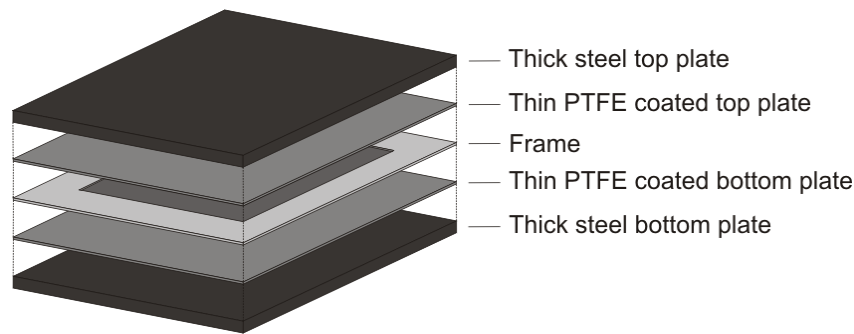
Schematic view of the five component compression mould used to manufacture the flat sheet materials.
